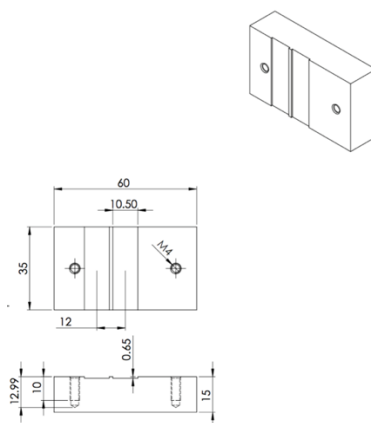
Bottom part of acrylic detection cell. The recessed grooves accept a pair of rubber spacers on top of which the Ag/AgCl foil containing the punched adhesive tape is placed. Screwing top and bottom parts together completes the cell.
